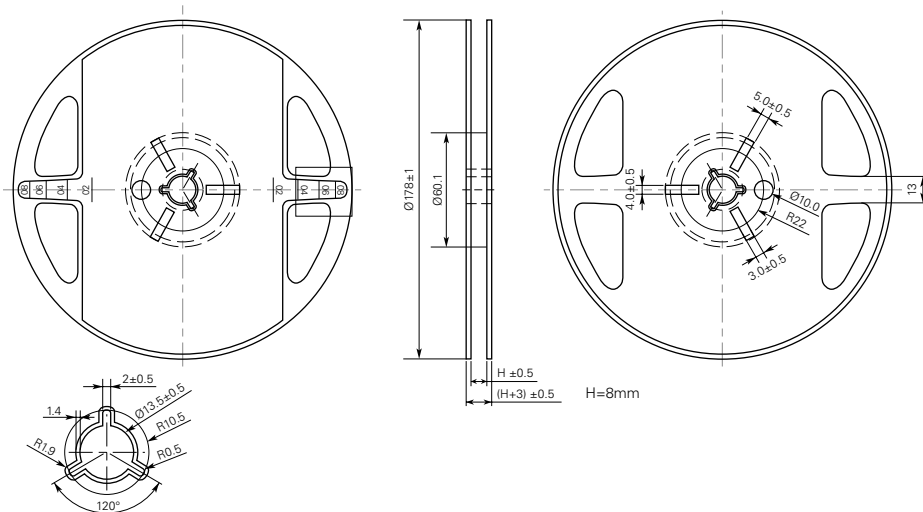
Reel Dimensions for ZENxxxVyyyAzzYM Devices in Millimeters (mm)
